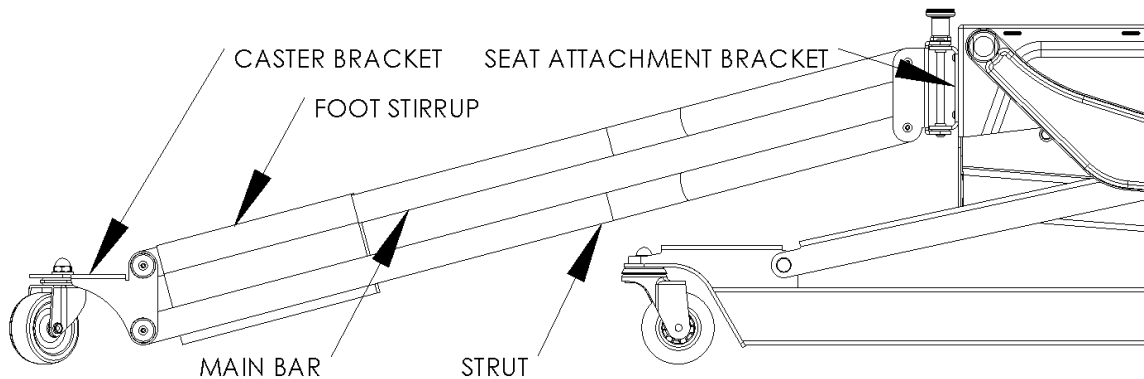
Close-up view of footrest locking mechanism (right side) of final design solution
